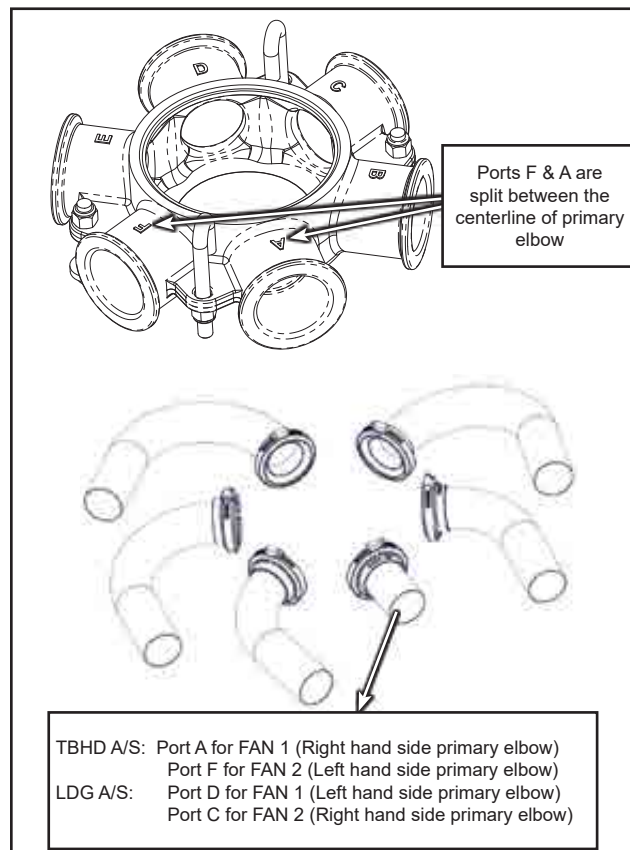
Primary Manifold Head & Elbows - 6 Port
